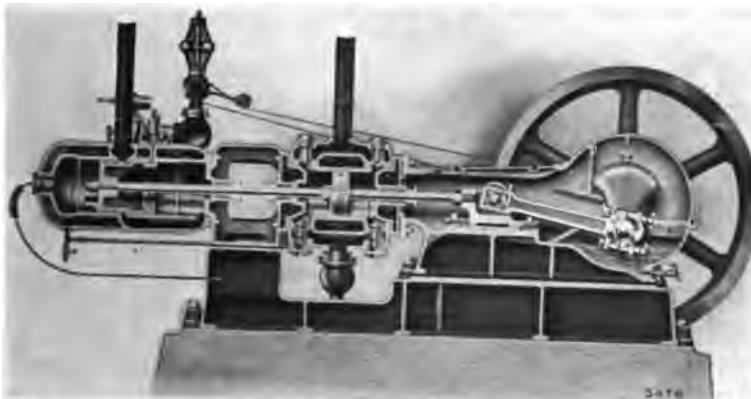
Section through a single-stage straight-line compressor in which the power cylinder is an internal combustion engine using gasoline fuel.
